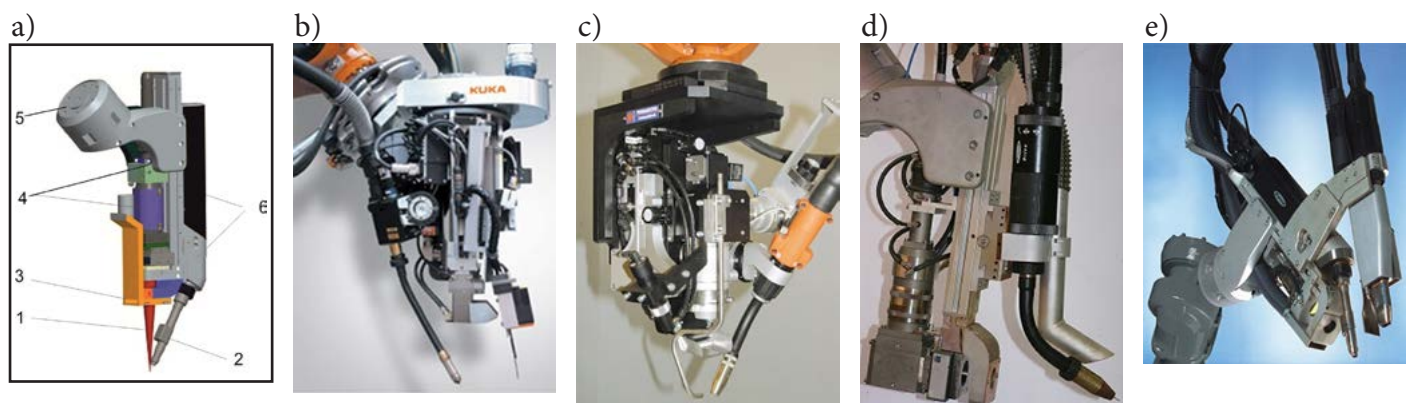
Specialist HLAW heads: a – basic modules of a hybrid welding head [10]: 1 – laser beam, 2 – arc method welding torch, 3 – cross-jet, 4 – optical system and a fibre optic coupling, 5 – fixing clamp, 6 – base plate, b – KUKA-manufactured KS HybridTec head [11], c – Permanova-manufactured WT03 head [12], d – Fronius-manufactured head for welding fillet welds [10], e – Fronius-manufactured “tandem” type head [10]
